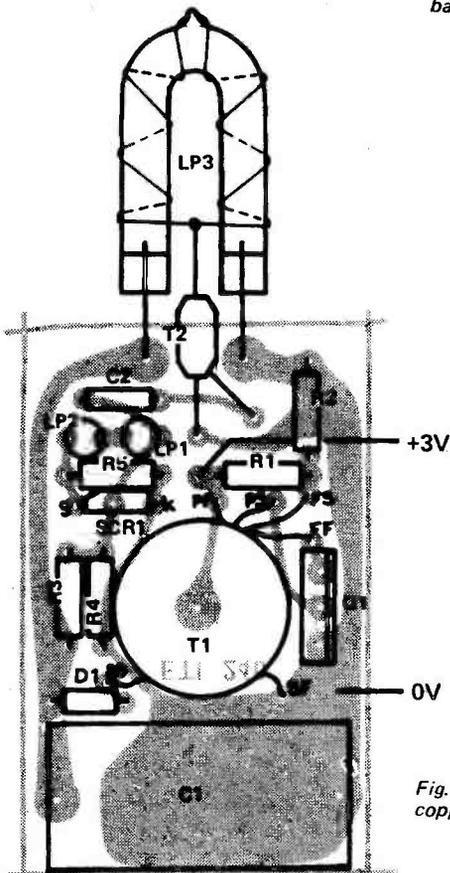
Component overlay. Note copper wire spiral around flash tube.
